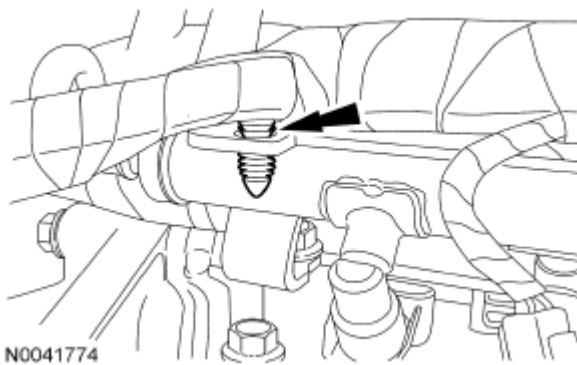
Locating Fuel Rail Wiring Harness Retainer
